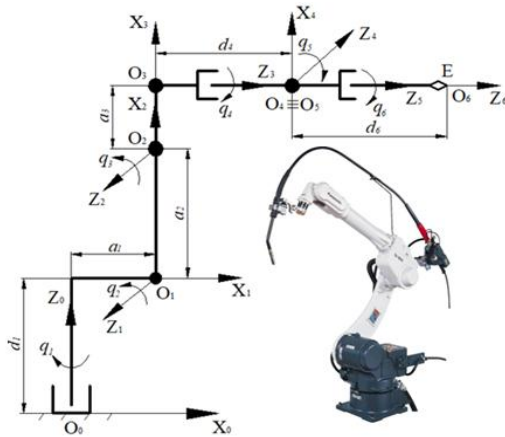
Kinematics model of the welding robot TA 1400
